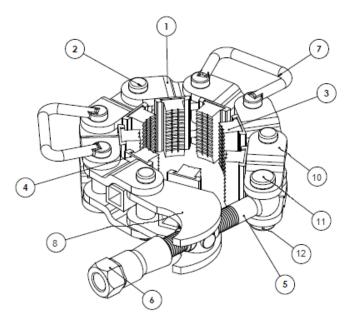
MP Safety Clamp				Assembly P/N	Assembly P/N
